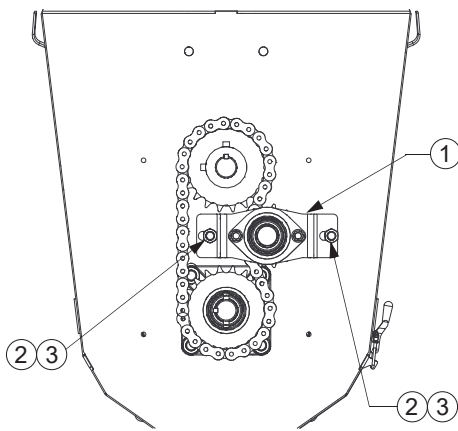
Drilling Reverser Bolt Holes Using Template
